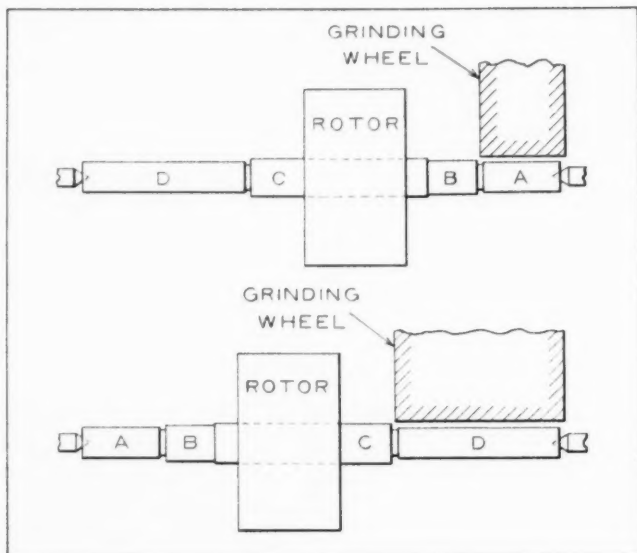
Diagrams Indicating Fifth and Sixth Grinding Operations, which Complete the Rotor and Shaft Assembly of a Fractional-horsepower Electric Motor
